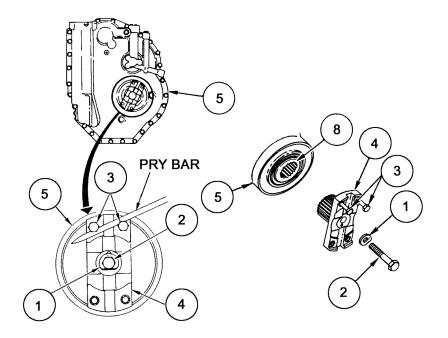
Left Hand Cover and Output Flange. INSTALLATION OF THE LEFT HAND OUTPUT FLANGE – Cont.
